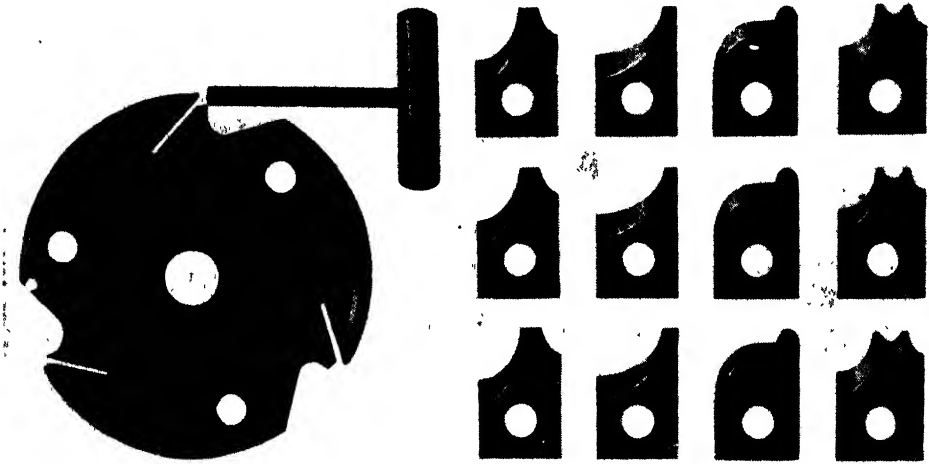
By using a molding head, equipped with various cutting blades, many different kinds of moldings and edgings are easily made. (Delta Power Tool Division, Rockwell Manufacturing Company)
